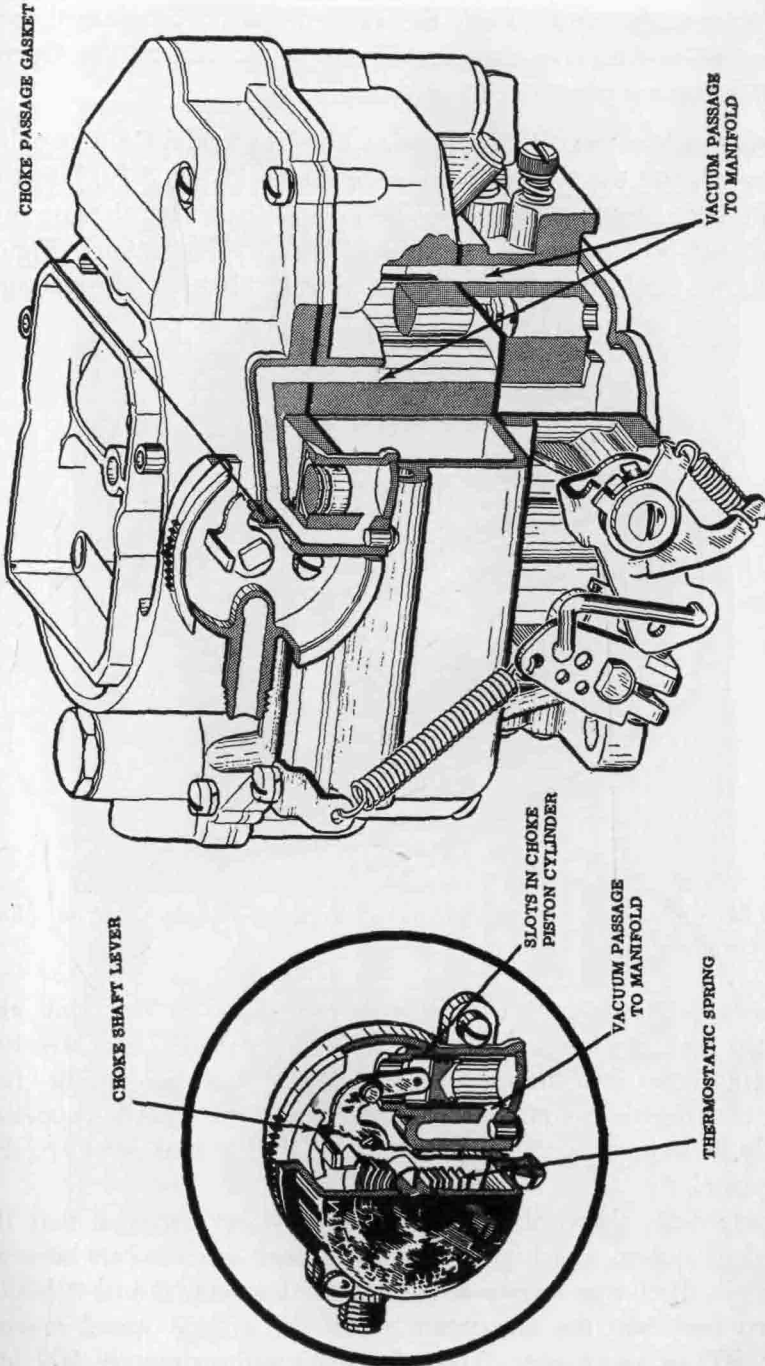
Choke circuit of four-barrel carburetor. (Oldsmobile Division of General Motors Corporation)
